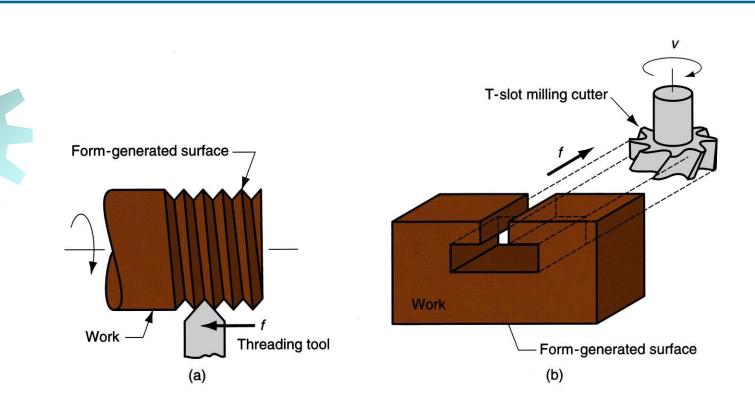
Combination of forming and generating to create shape: (a) thread cutting on a lathe, and (b) slot milling.
